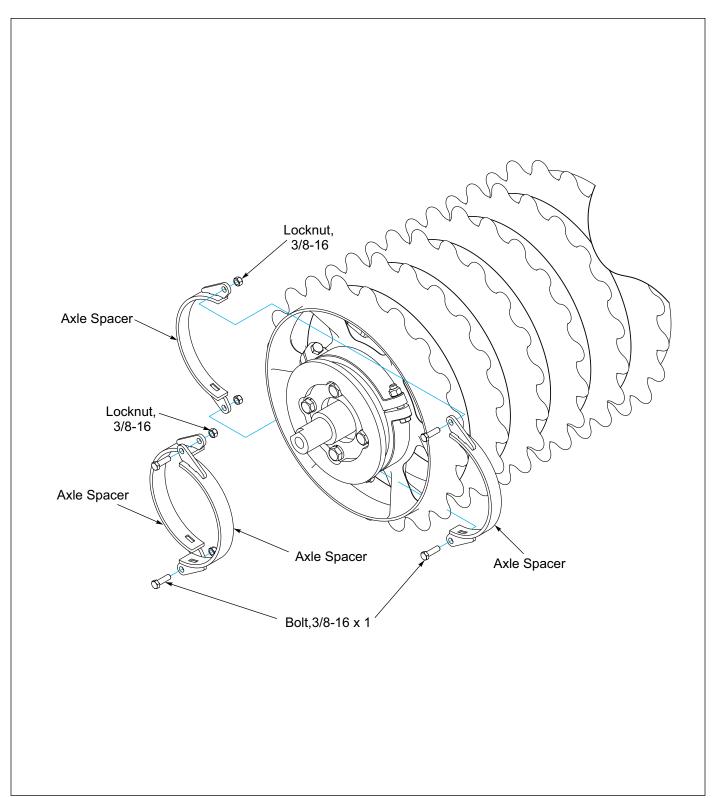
Clamp End Spacer Kits 2 of 2 - Optional
